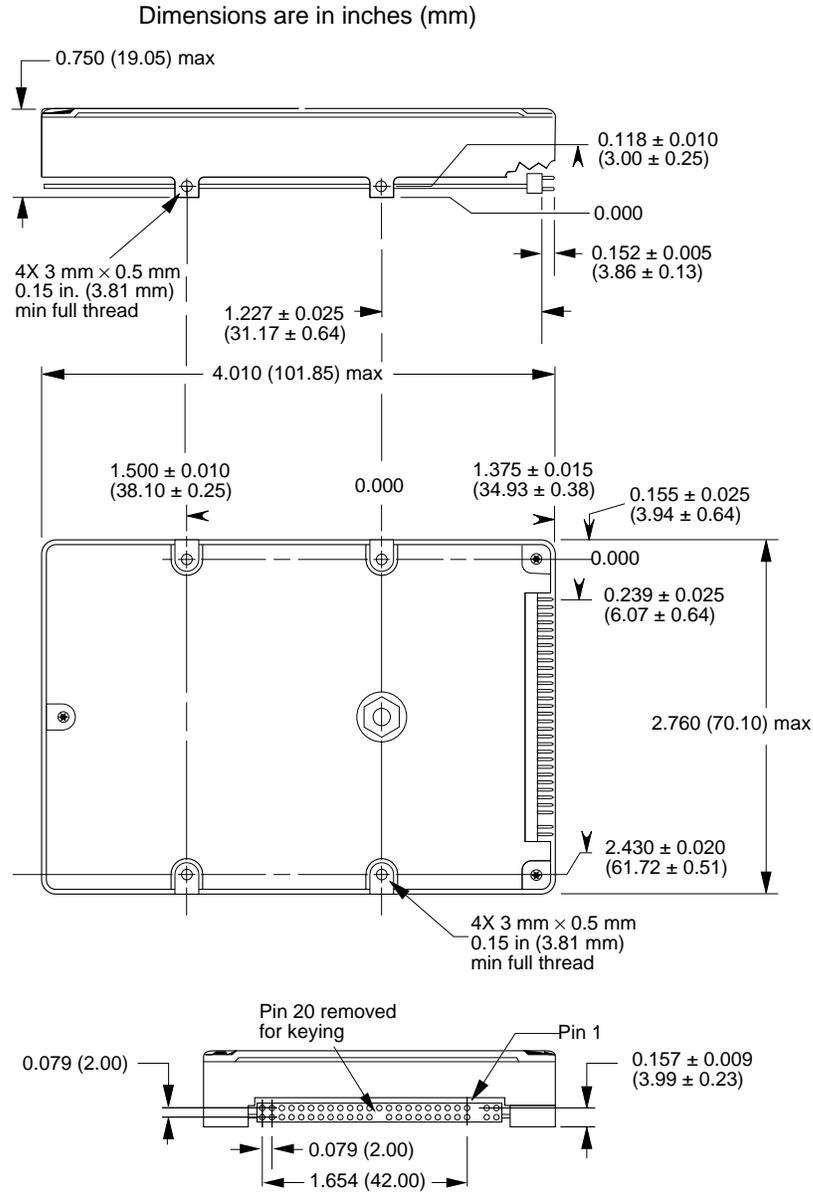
ST9235A and ST9235AG mounting dimensions (MCC mounting version)
